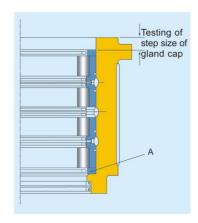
assembly sequences of four-row cylindrical roller bearings
